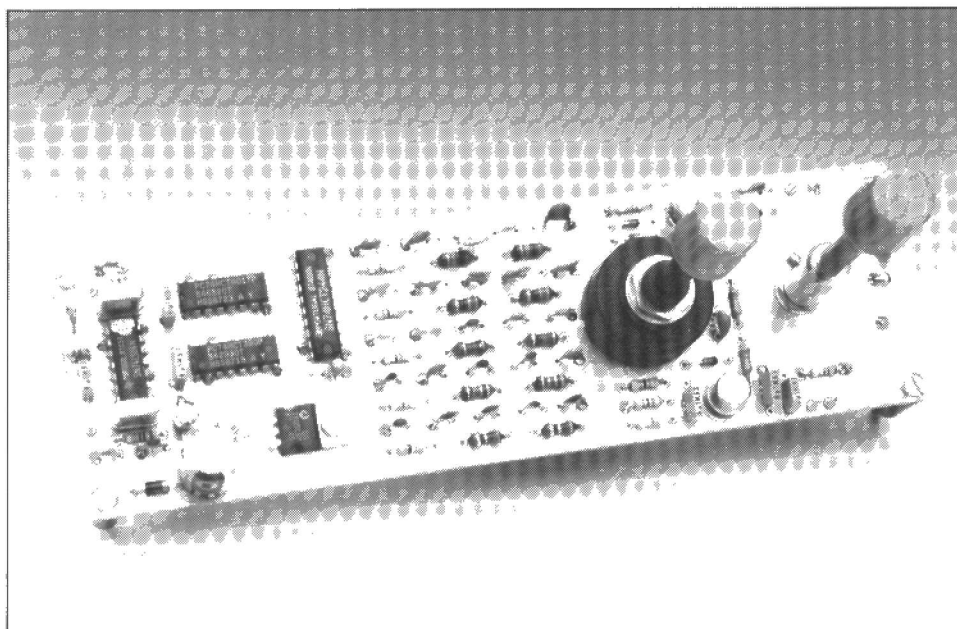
Completed PCB before installation in the enclosure. Note that a dual-pointer knob is fitted on the spindle of the tuning capacitor.
